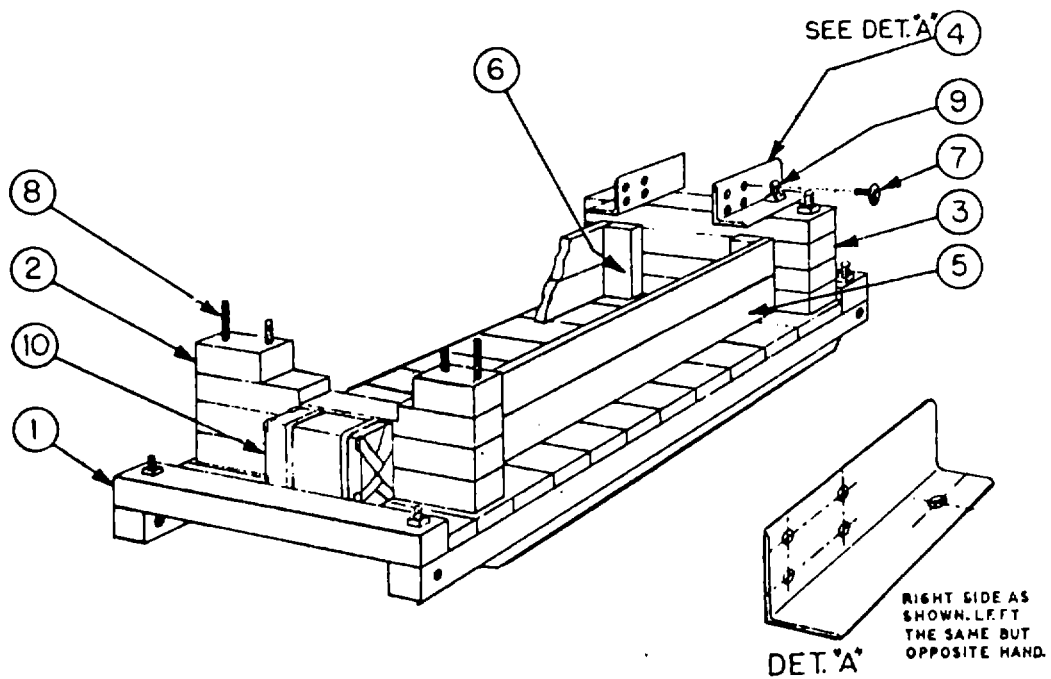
Typical Blocking, Bracing, and Anchoring Arrangements, MIL-C-104.
